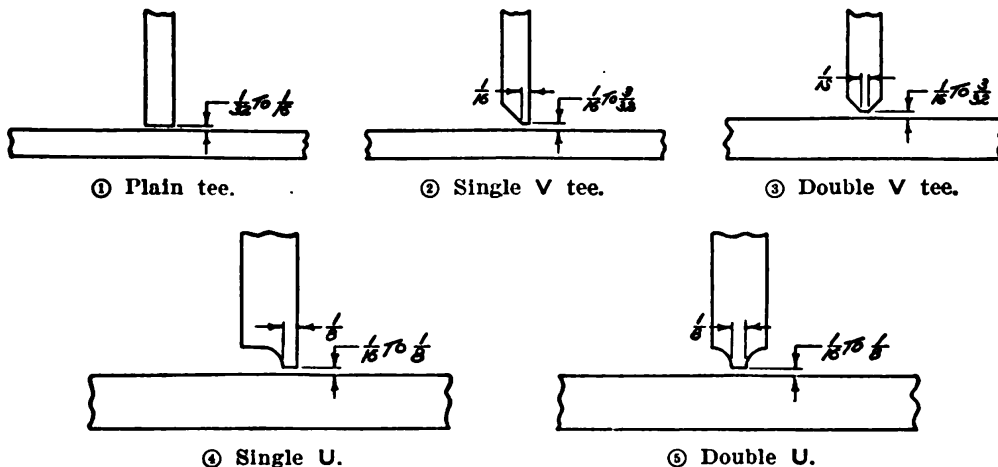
Preparation of metals for welding tee joints.
